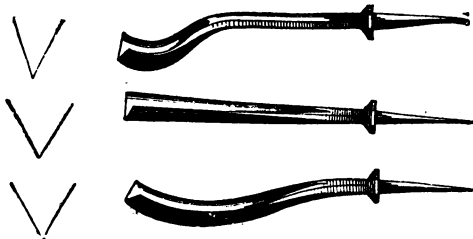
TYPES OF V OR PARTING TOOLS.
